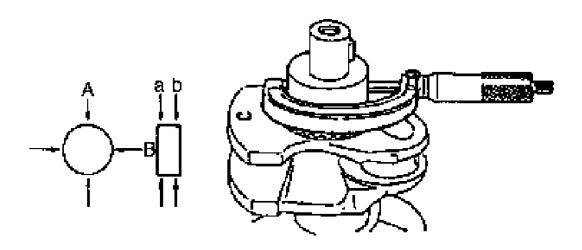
Checking Crankshaft Journal Thickness Courtesy of SUZUKI OF AMERICA CORP.
